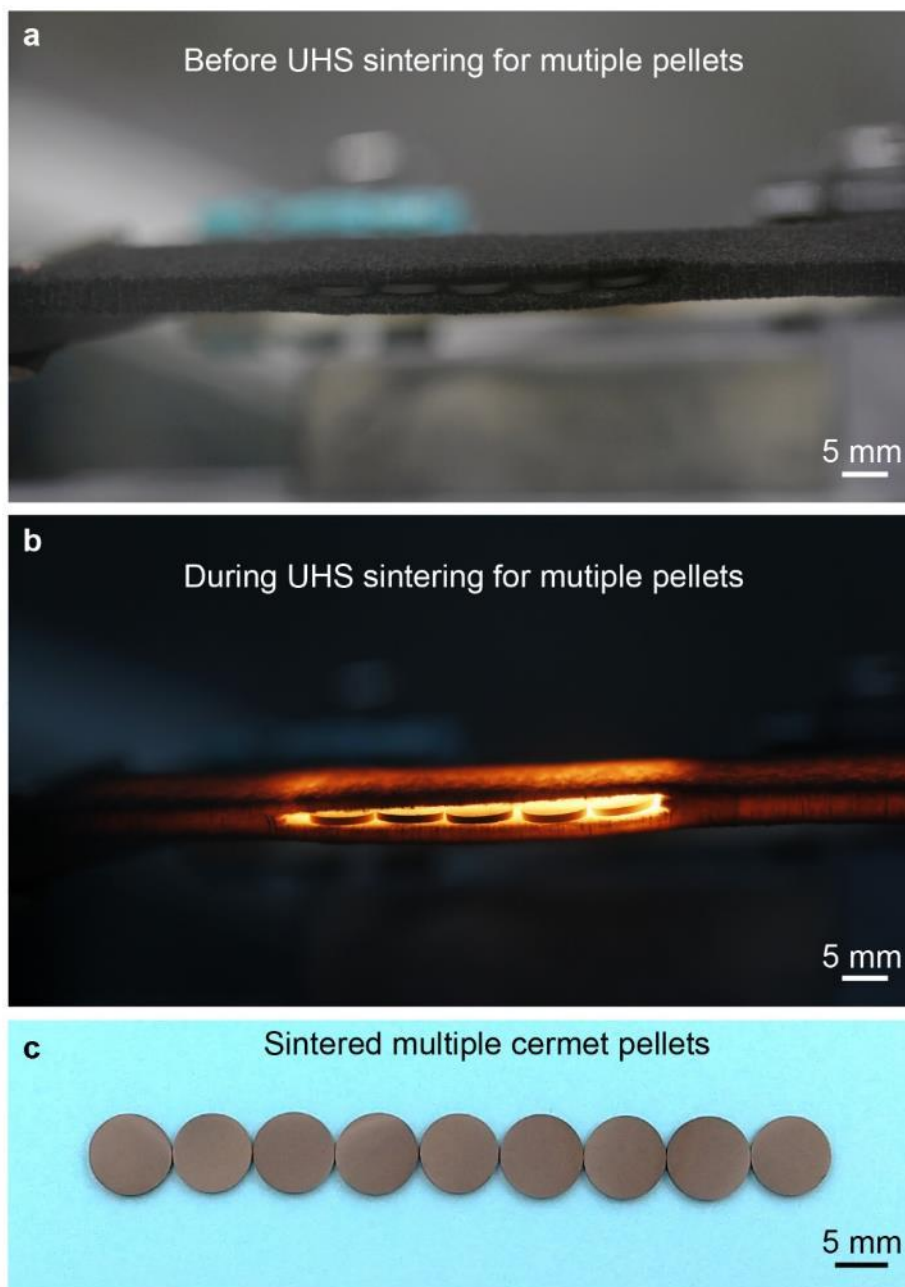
Sintering multiple cermet pellets simultaneously. Multiple green pellets sandwiched between two large size Joule-heating carbon felt strips before (a) and during (b) our ultrafast sintering. (c) Picture of the cermet pellets sintered in one batch.
